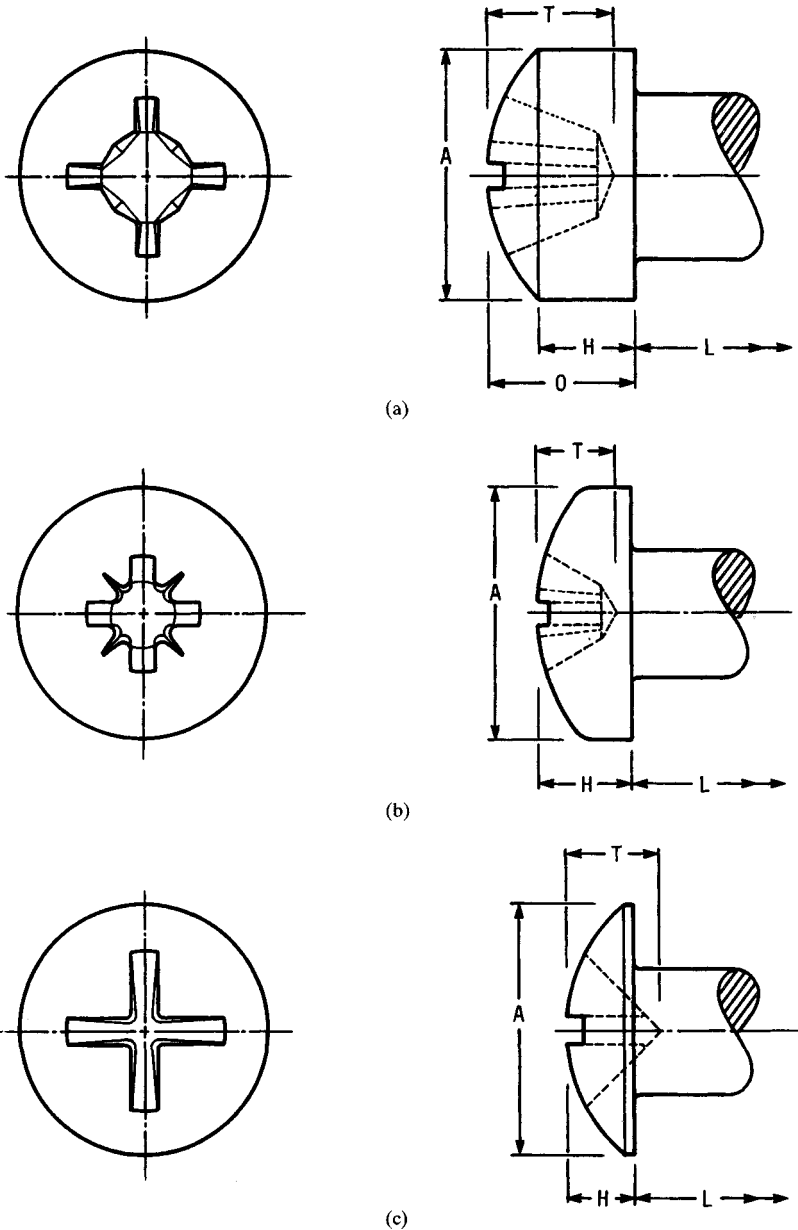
The three standard recesses. (a) Fillister-head machine screw with Type 1 cross-recess. This recess has a large center opening, tapered wings, and a blunt bottom. (b) Pan-head machine screw with Type 1A cross-recess. This recess has a large center opening, wide straight wings, and a blunt bottom. (c) Truss-head machine screw with Type 2 cross-recess. This recess has two intersecting slots with parallel sides. The sides converge to a slightly truncated apex at the bottom.
